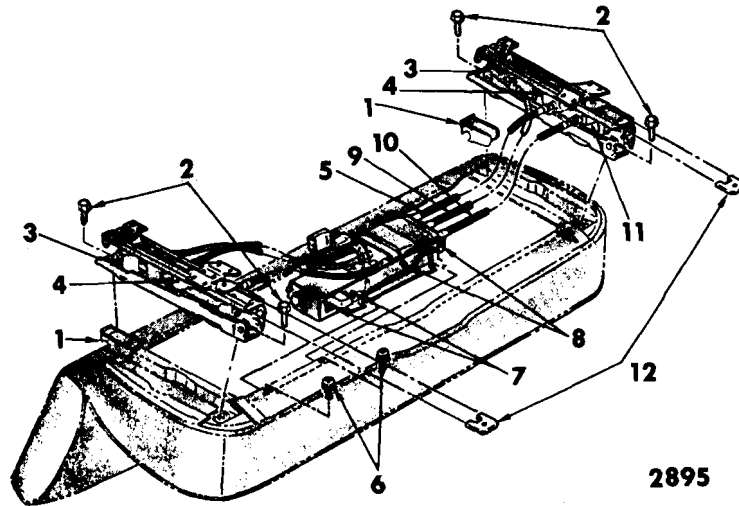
Front Seat Assembly—Six-Way - "B & C" Full Width Seat
